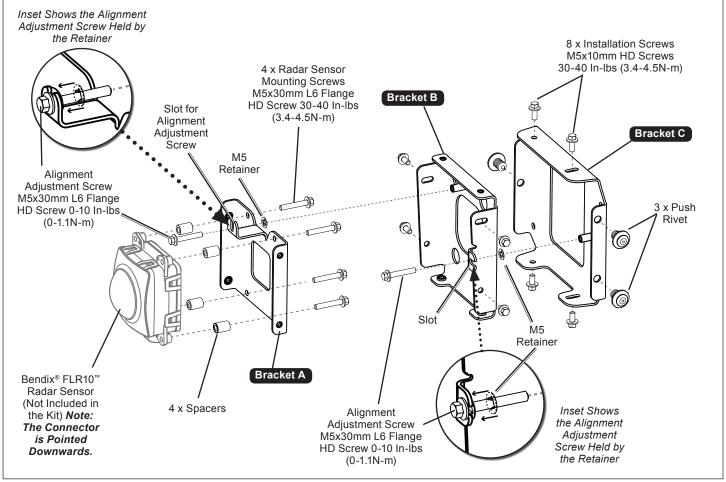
EXPLODED VIEW OF KIT COMPONENTS
